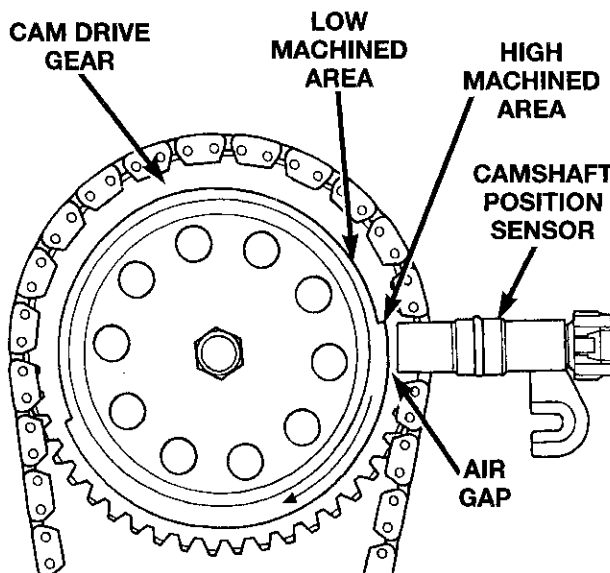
Camshaft Position Sensor Location—8.0L V-10 Engine
